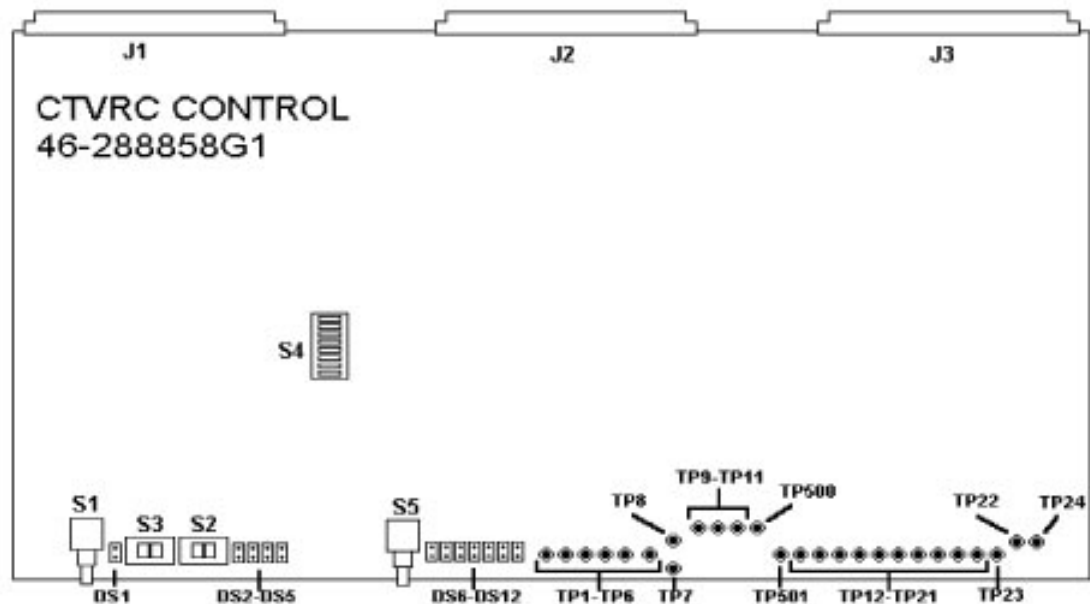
46-288858G1, CTVRC Control Board Test Points
